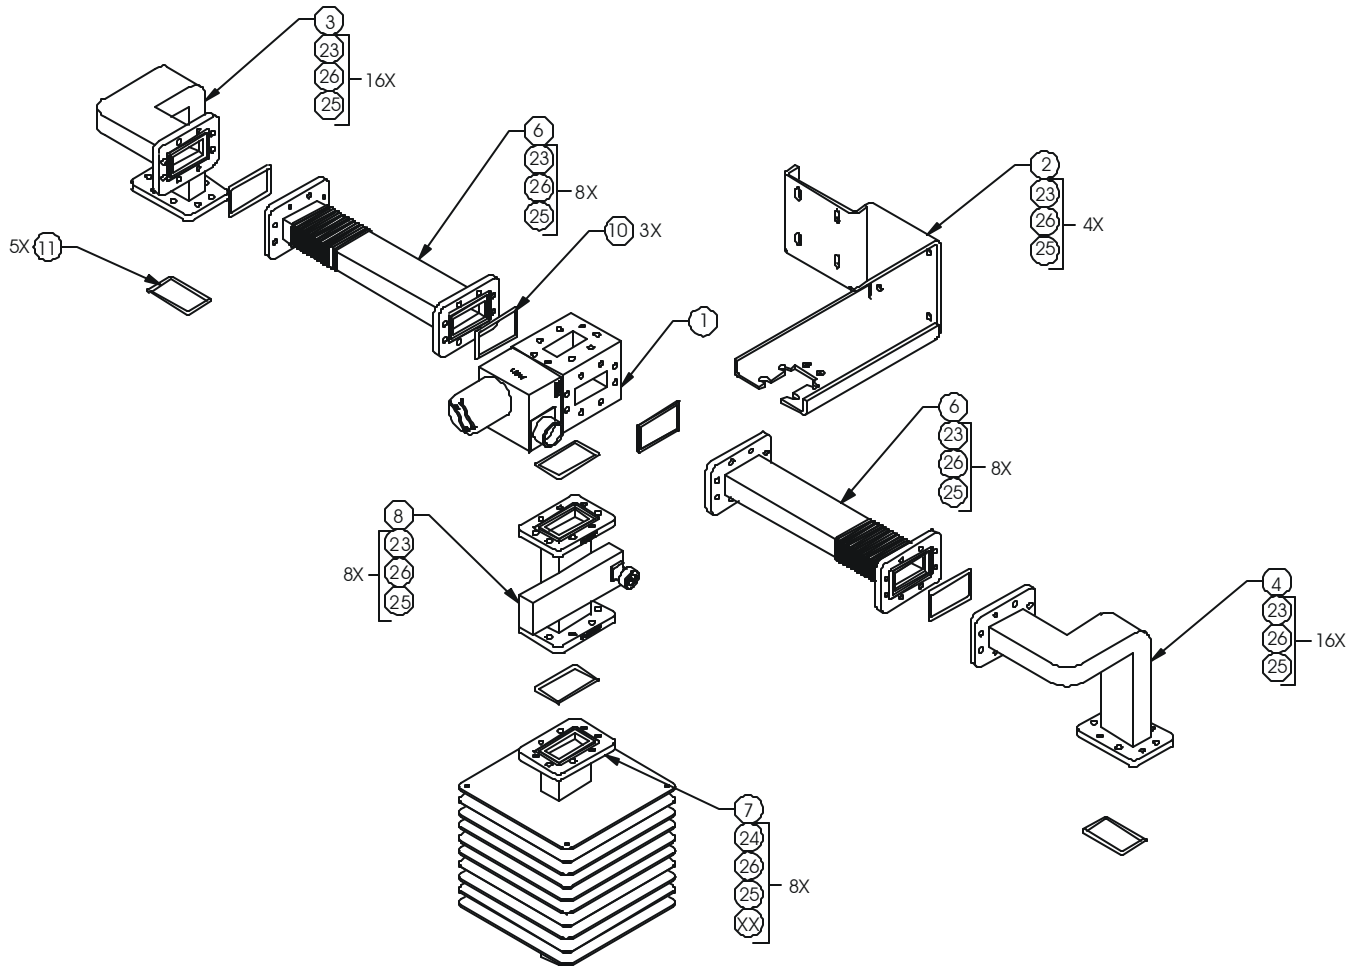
Redundant 1:1 ODP A C-Band Assembly Kit, P/N KT/11799
